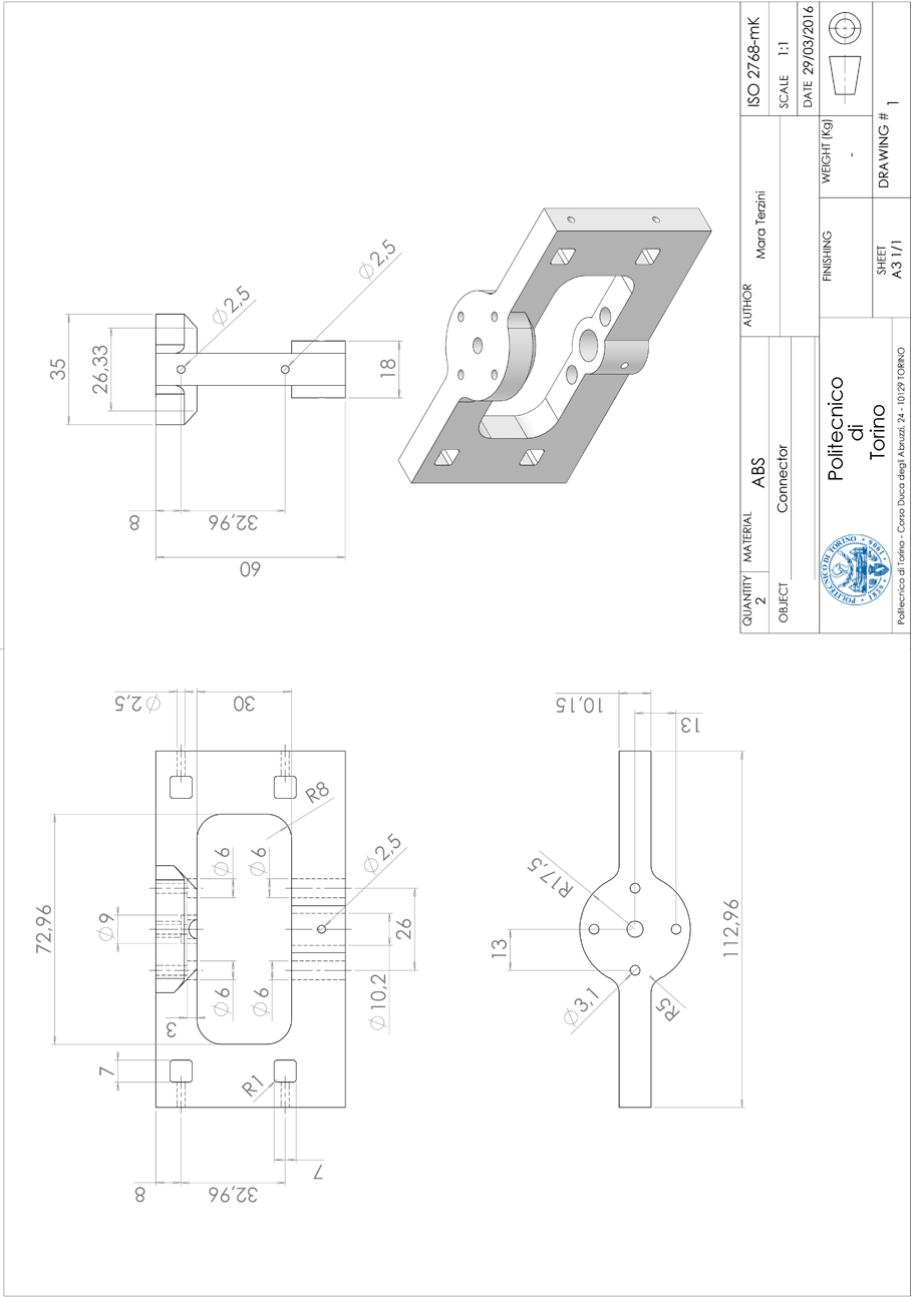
Connector drawing. The connector is included both in the upper and in the lower crossheads.
